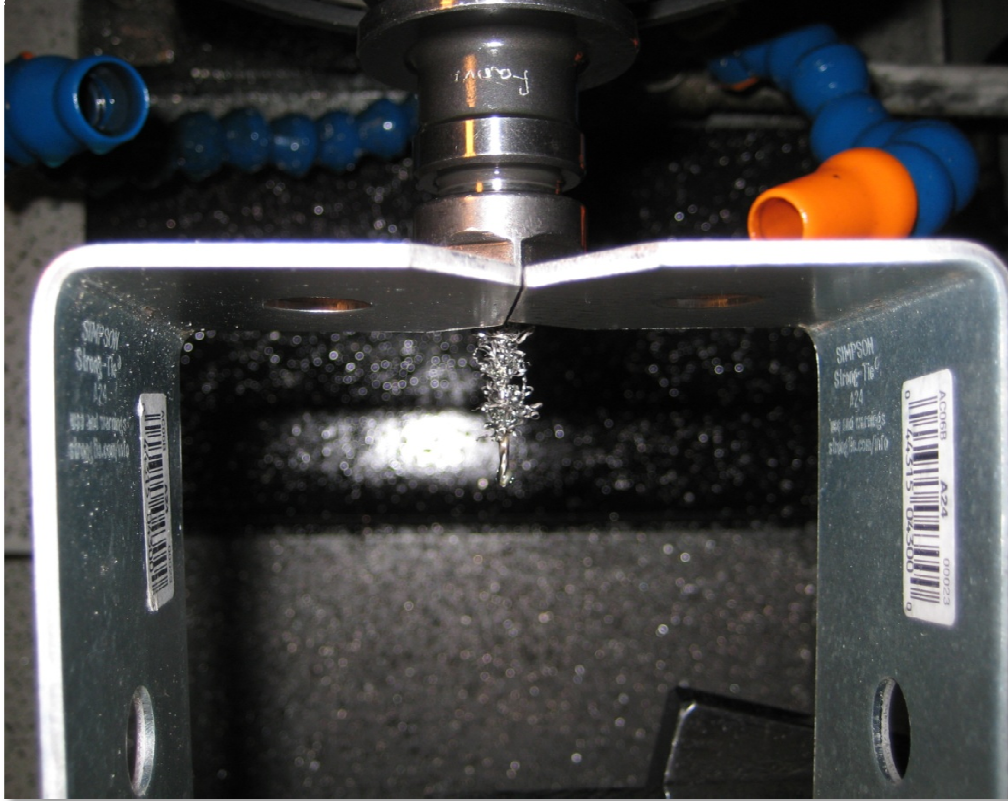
Position of bit directly before entering spring loaded hinge prototype.
